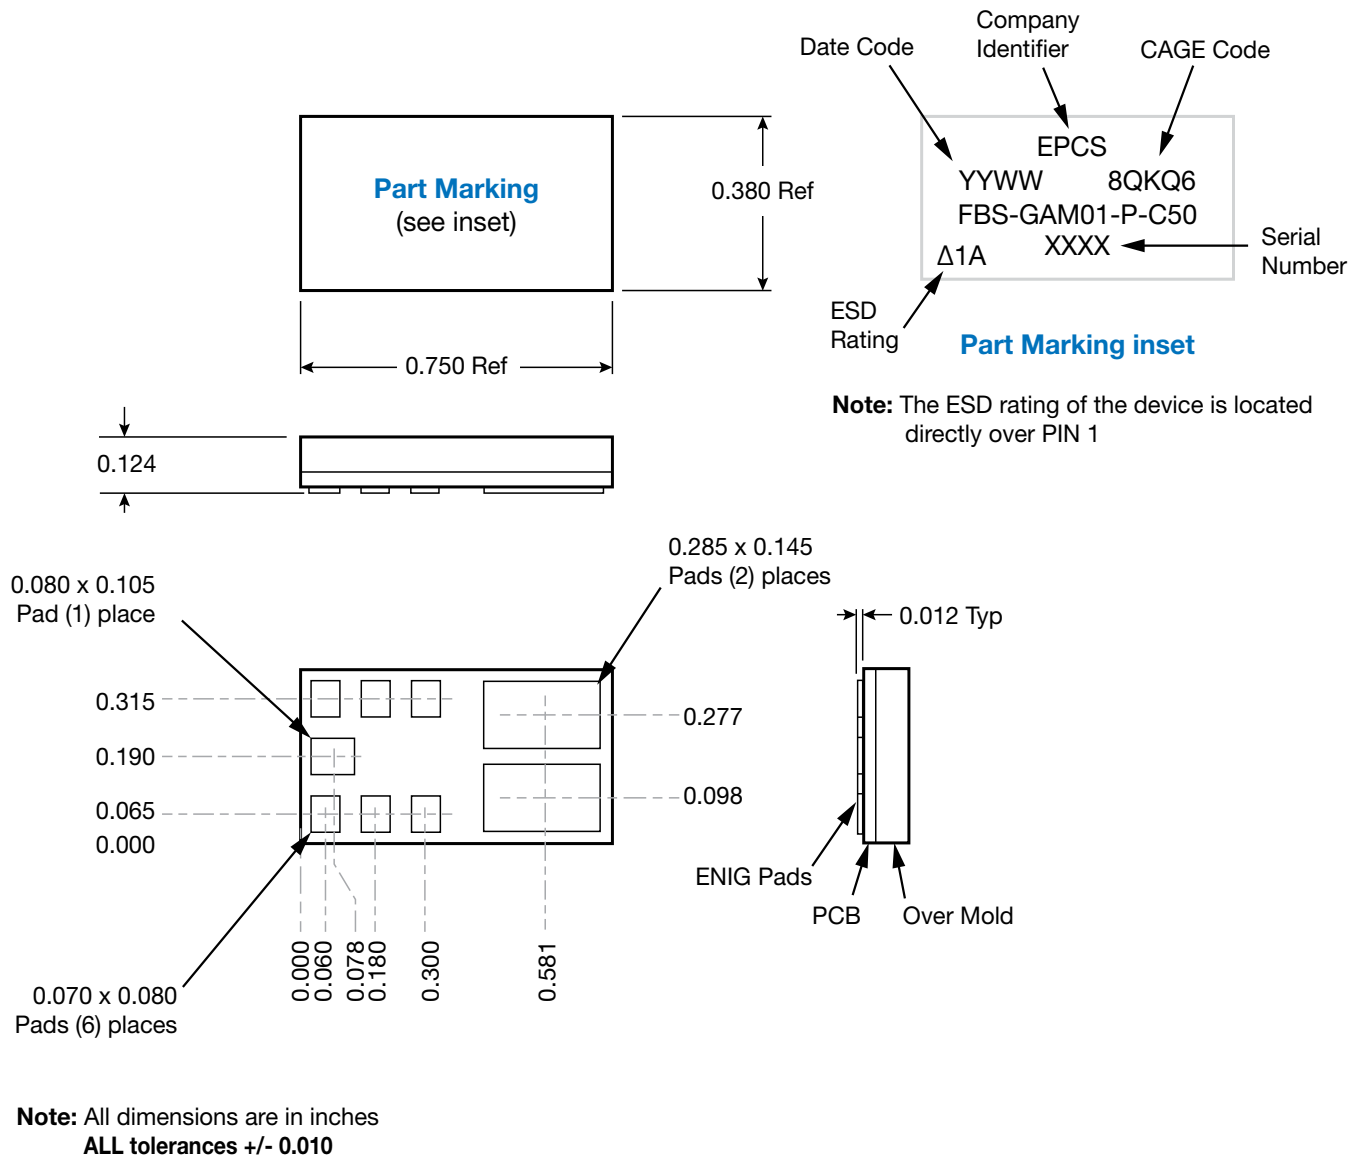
FBS-GAM01-P-C50 Package Outline and Dimensions
